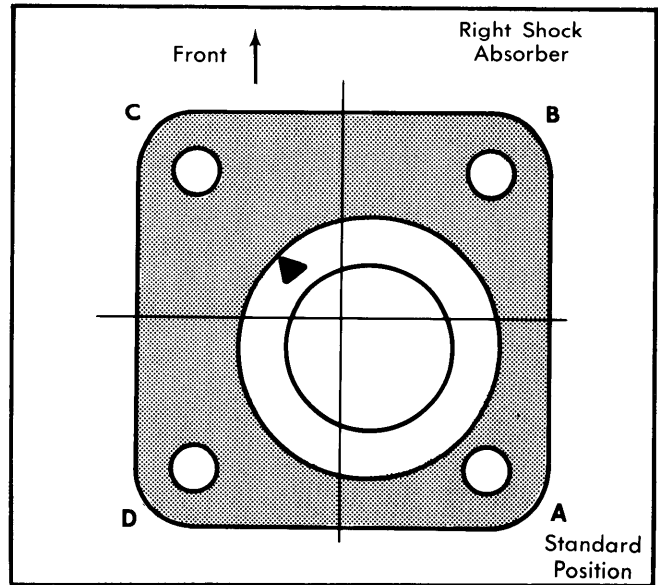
RX7 & 626 Caster and Camber Adjusting Pad (Position "C" Shown)
